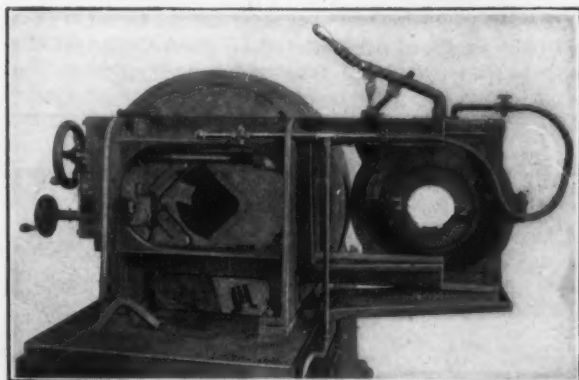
A Rear View of the Die Head, Showing the Cutting-Off Tool, Reaming Tool and Steady Slides.
